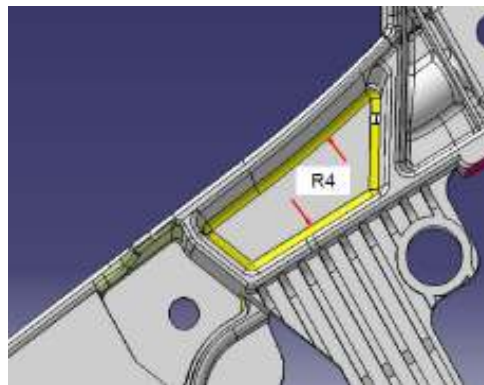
the connecting radius $R=4$ next to the bolt area. Side frame.
